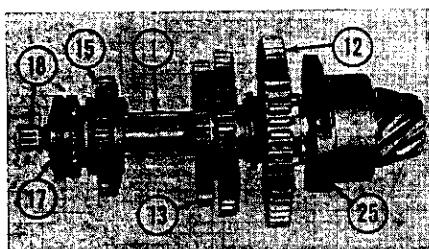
Removed spline shaft showing gears and pilot bearing (18). Refer to Fig. 108 or 109 for legend.
